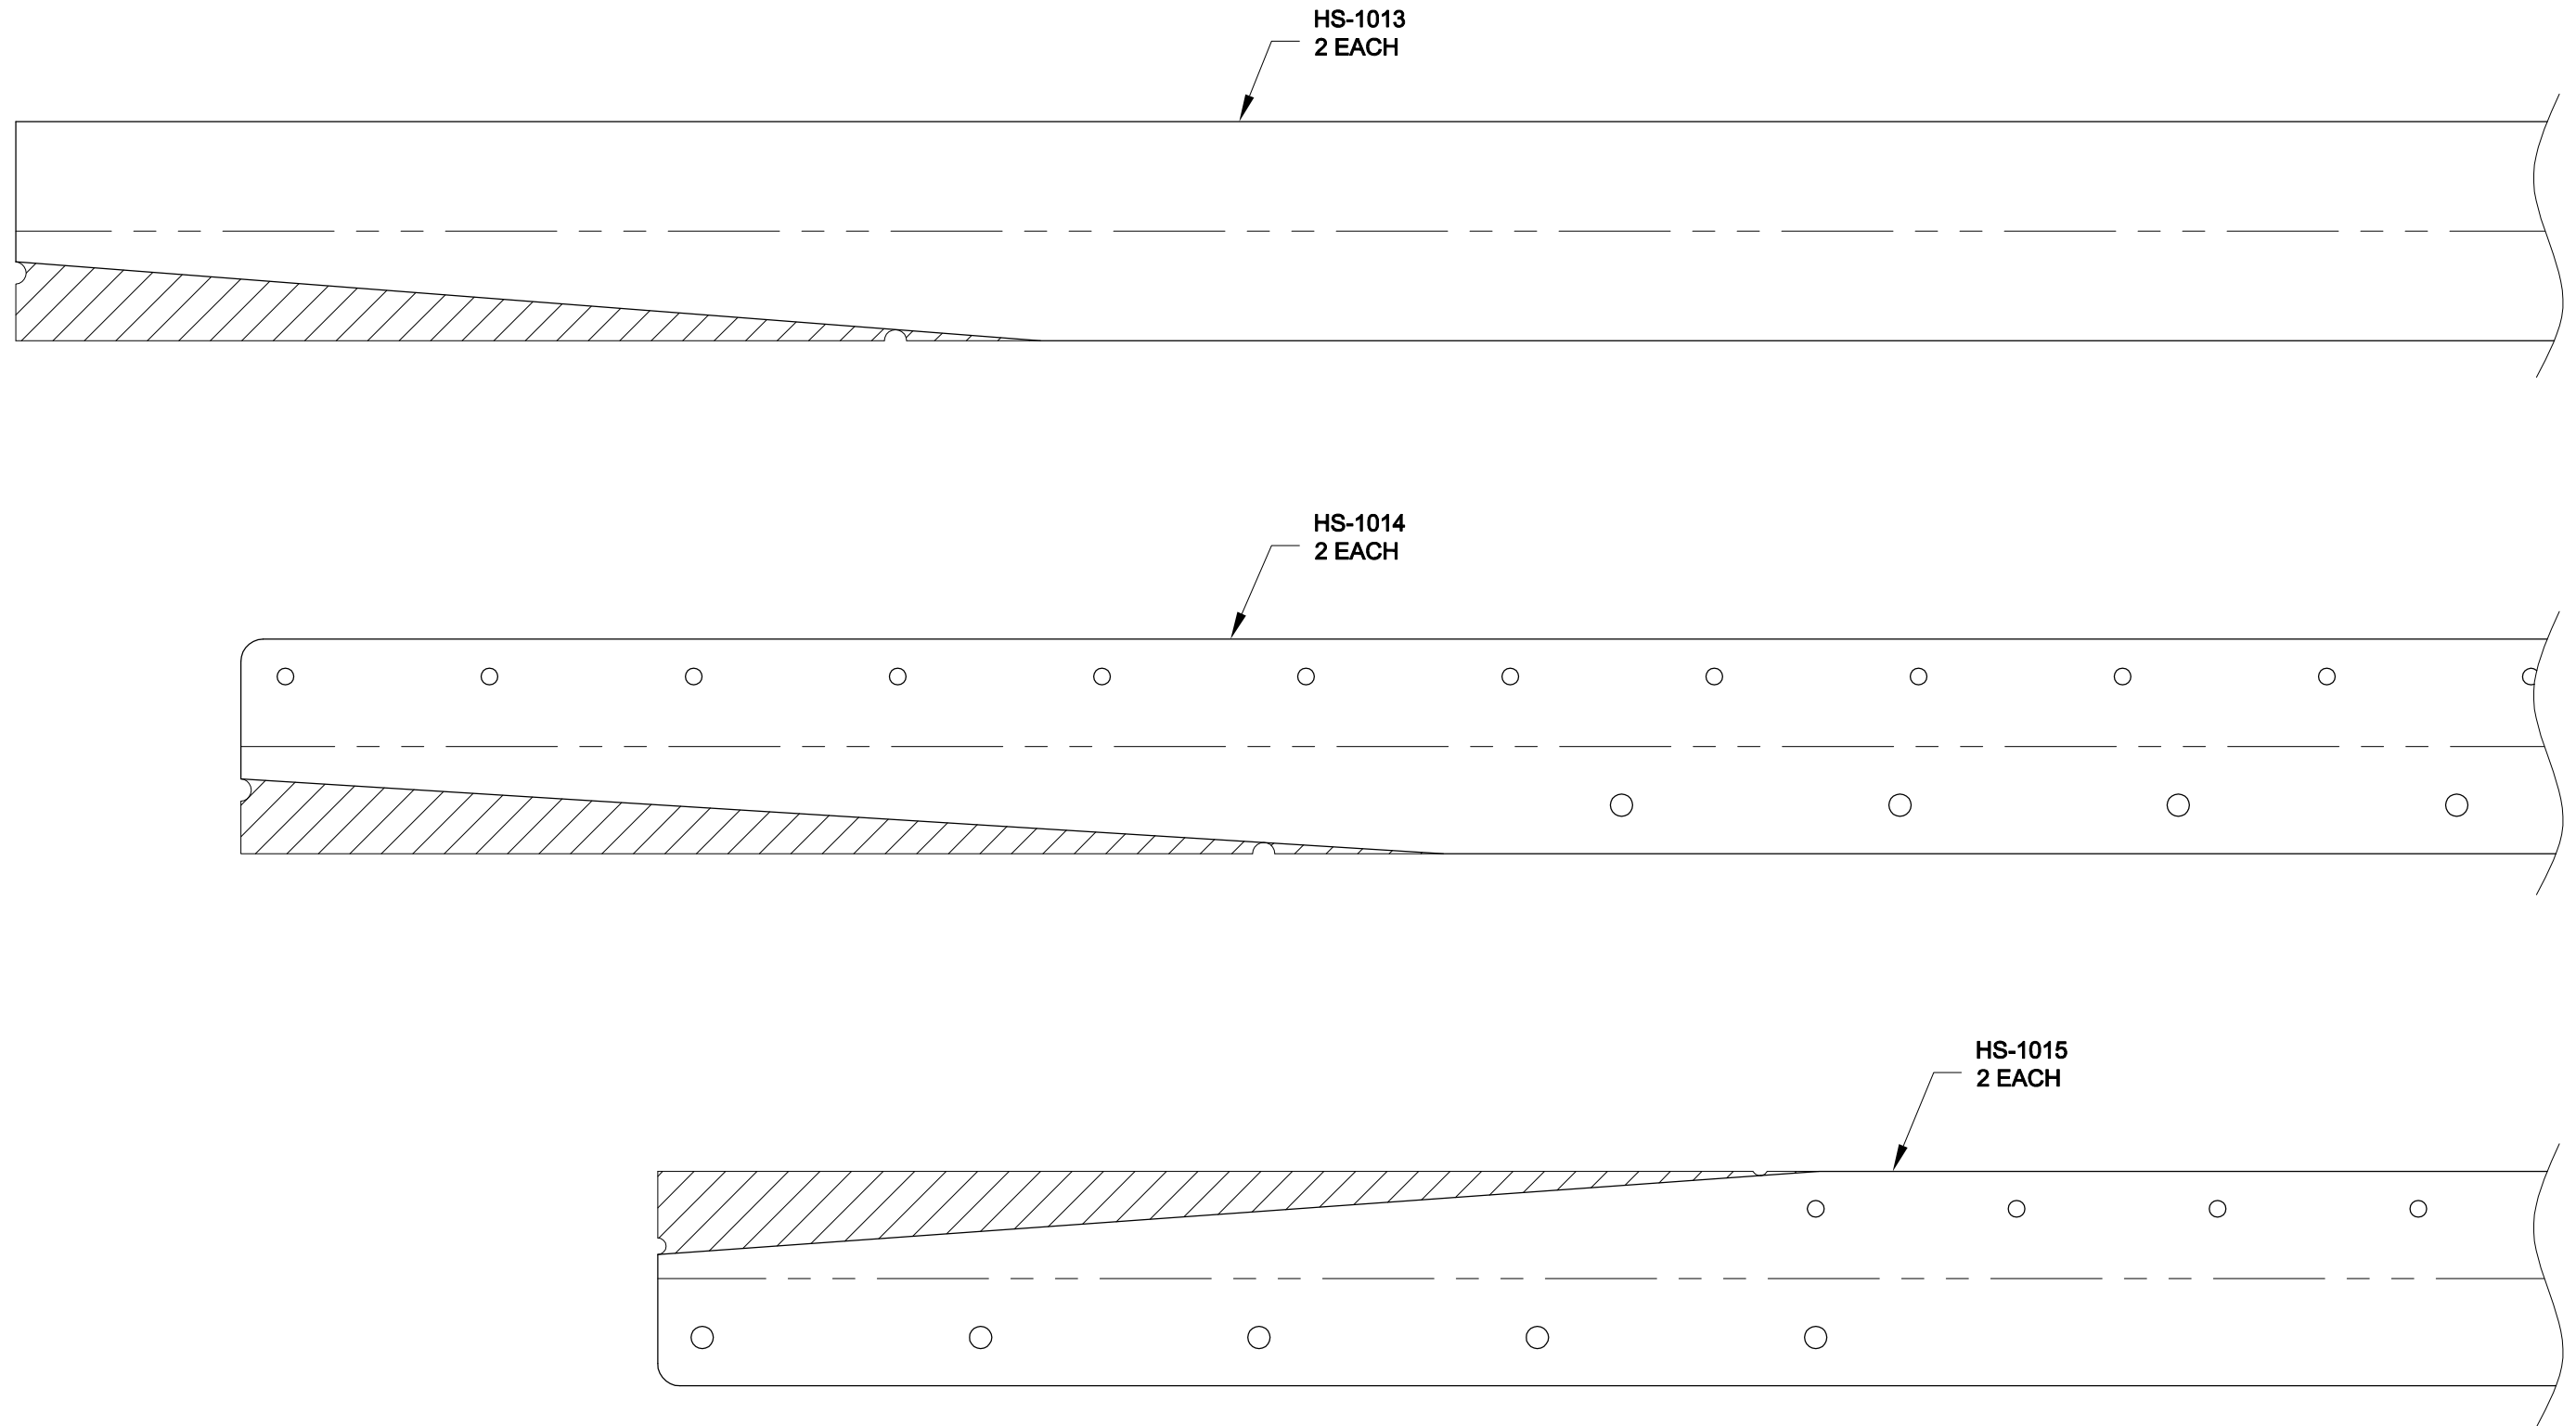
RIGHT FRONT SPAR ATTACHMENT BRACKET
